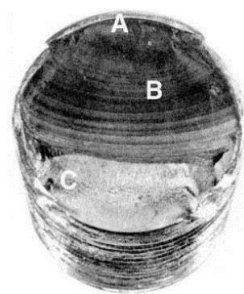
Fatigue failure of a bolt due to repeated unidirectional bending.
